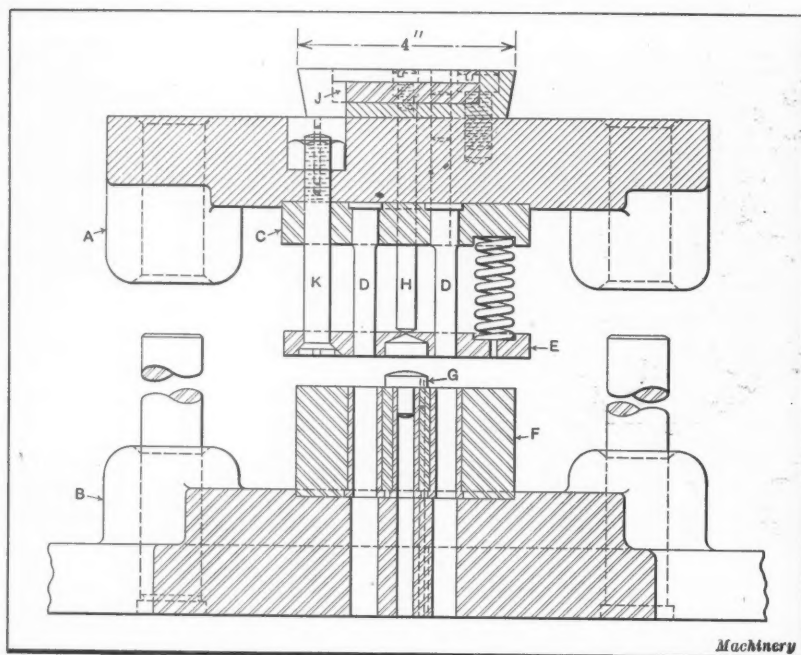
Sectional View of the Sub-press Die shown in Fig. 3
